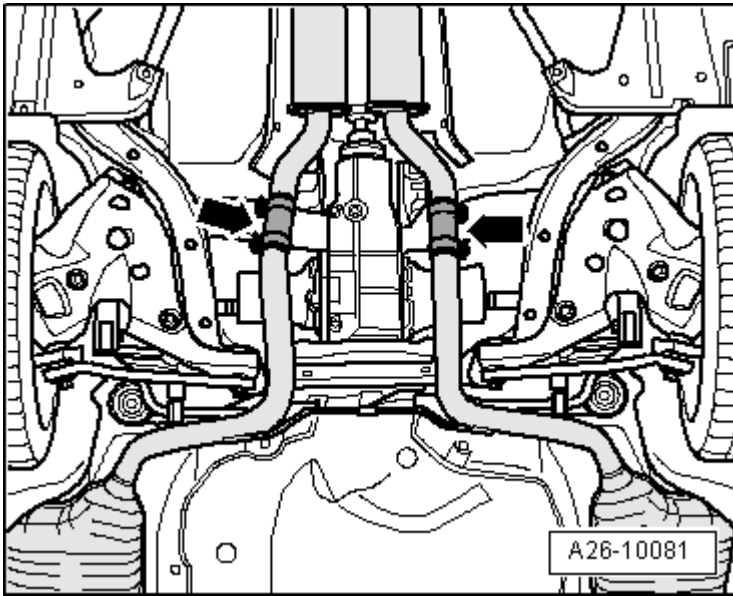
Positioning Clamping Sleeves At Center Of Separating Cut
